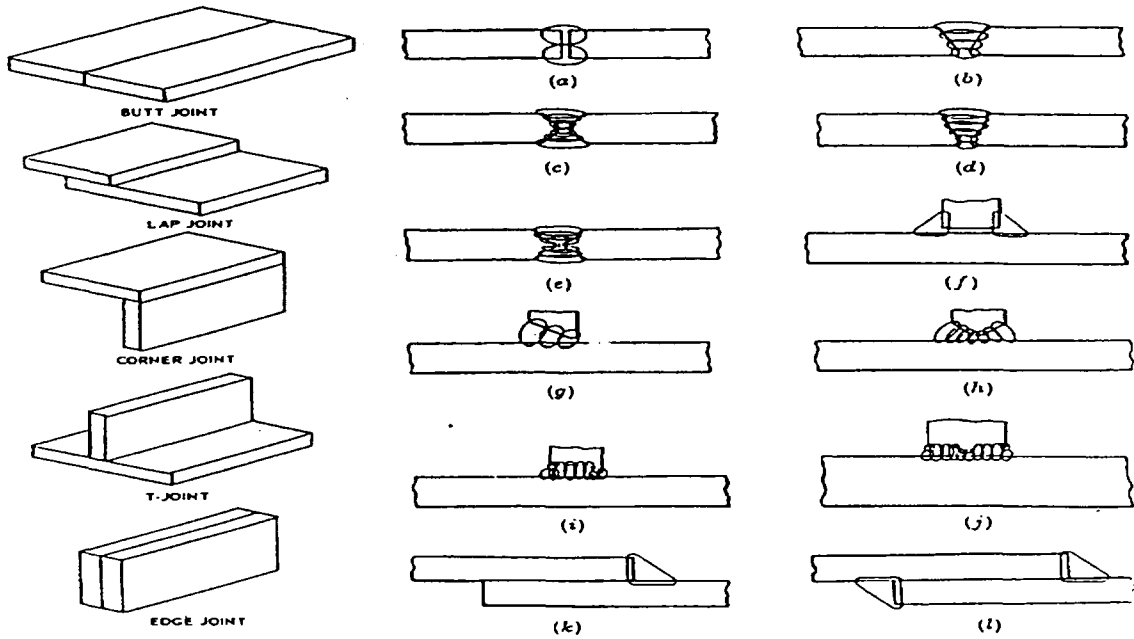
Types of Welding joints; (a) square butt joint, (b) single-v butt joint, (c) double-v butt joint, (d) single-u butt joint, (e) double-u butt joint, (f) square-t joint, (g) single-bevel t-joint, (h) double-bevel t-joint, (i) single-u t-joint, (j) double-u t-joint, (k) single-bead lap joint, (l) double-bead lap joint.
